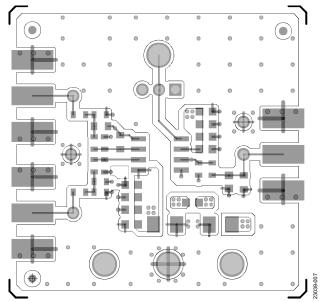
EVAL-LTC6226S8/EVAL-LTC6228IS8 Layout Pattern, Primary Side
